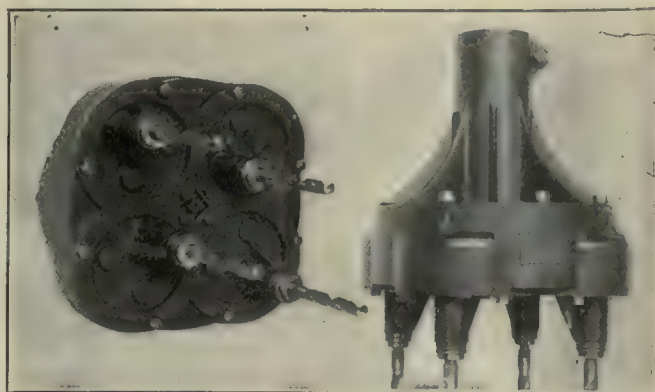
FOUR-SPINDLE, ADJUSTABLE-CENTER DRILLING MACHINE HEAD
